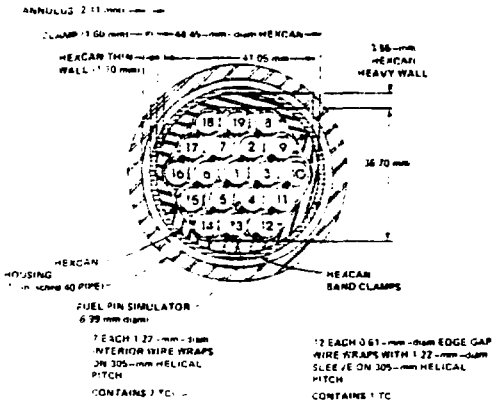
THORS-SHRS ASSEMBLY 1 BUNDLE CROSS SECTION
